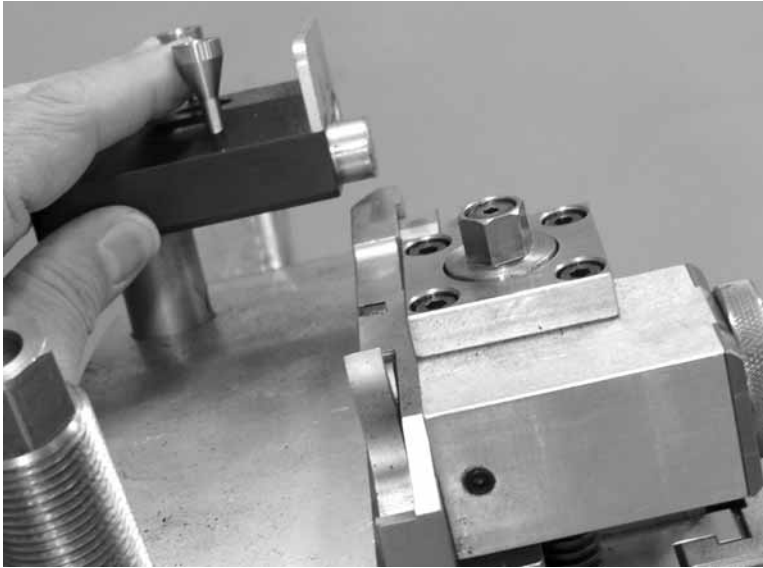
Push the trip knobs back to disengage the trips before starting the machine.
